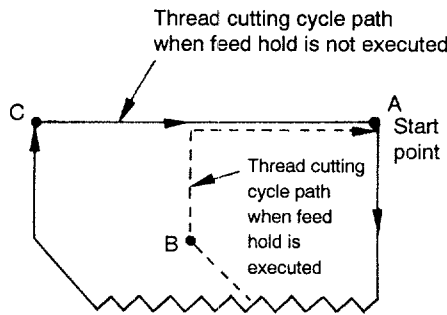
Feed Hold during Thread Cutting Cycle
